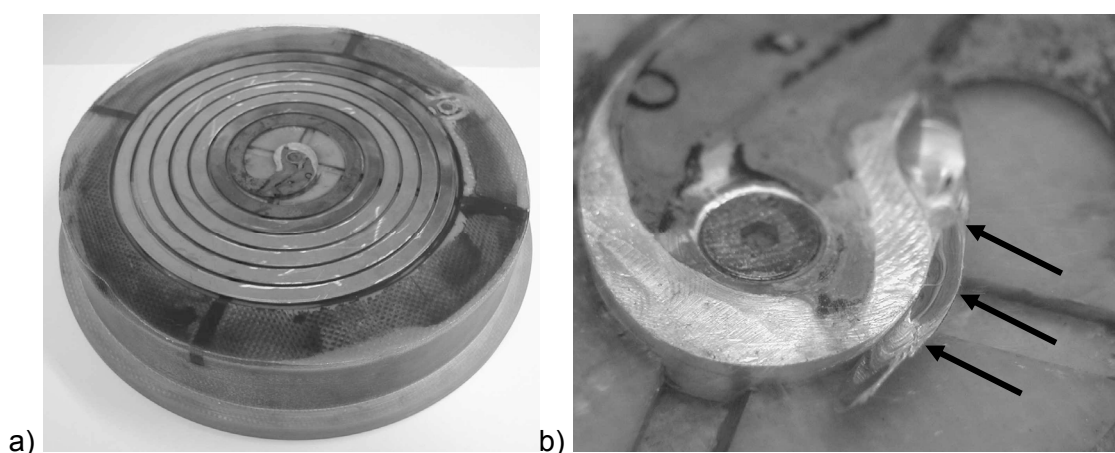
Flat coil with spiral turns a) flat coil after casting, b) crack formation along the turn
